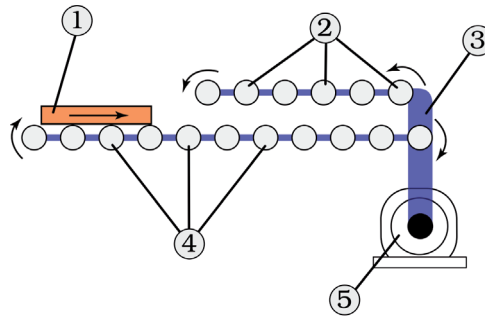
Scheme of rolling mill without load: 1– blank, 2 – top rolls, 3 – connecting mechanism, 4 – bottom rolls, 5 – synchronous motor
